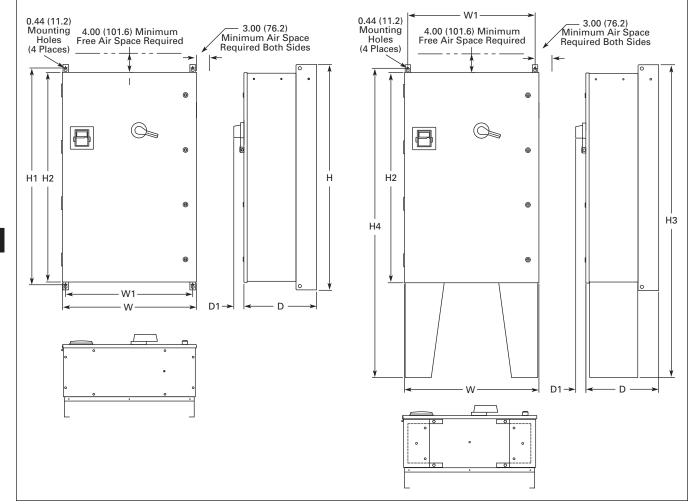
Enclosure	Box C —	UL Type	12 Dimensions
